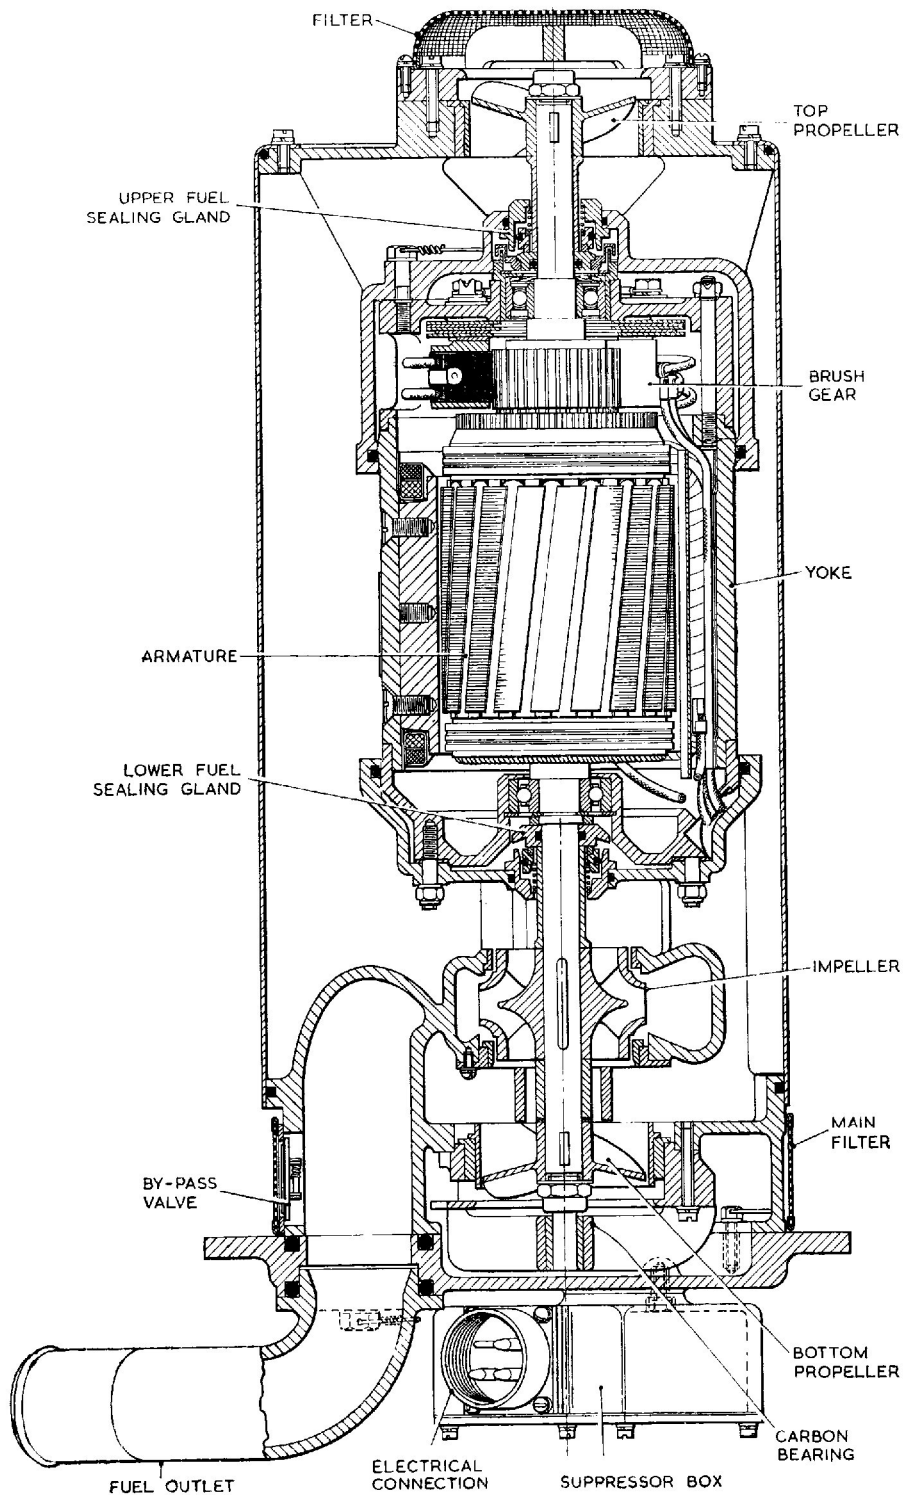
Sectional view of PDC.2400 DE fuel pump
